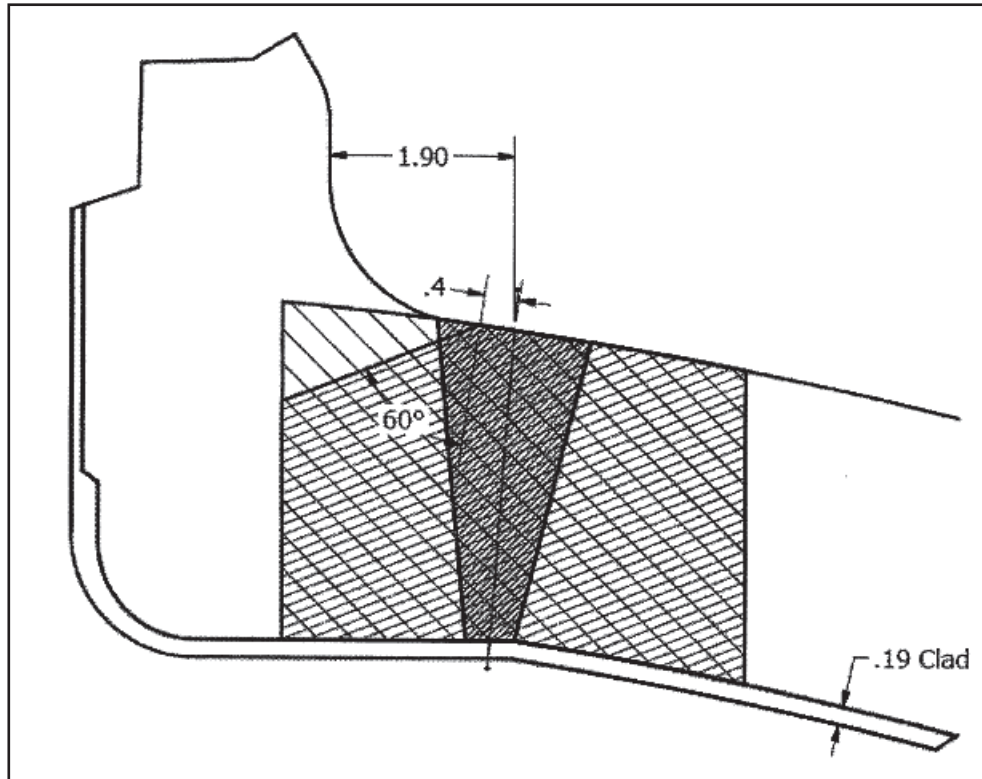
Weld WP-11, 60° Head Side Axial Scans
